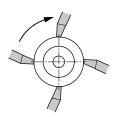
Checking the axial alignment with a calliper gauge – circumferential check
